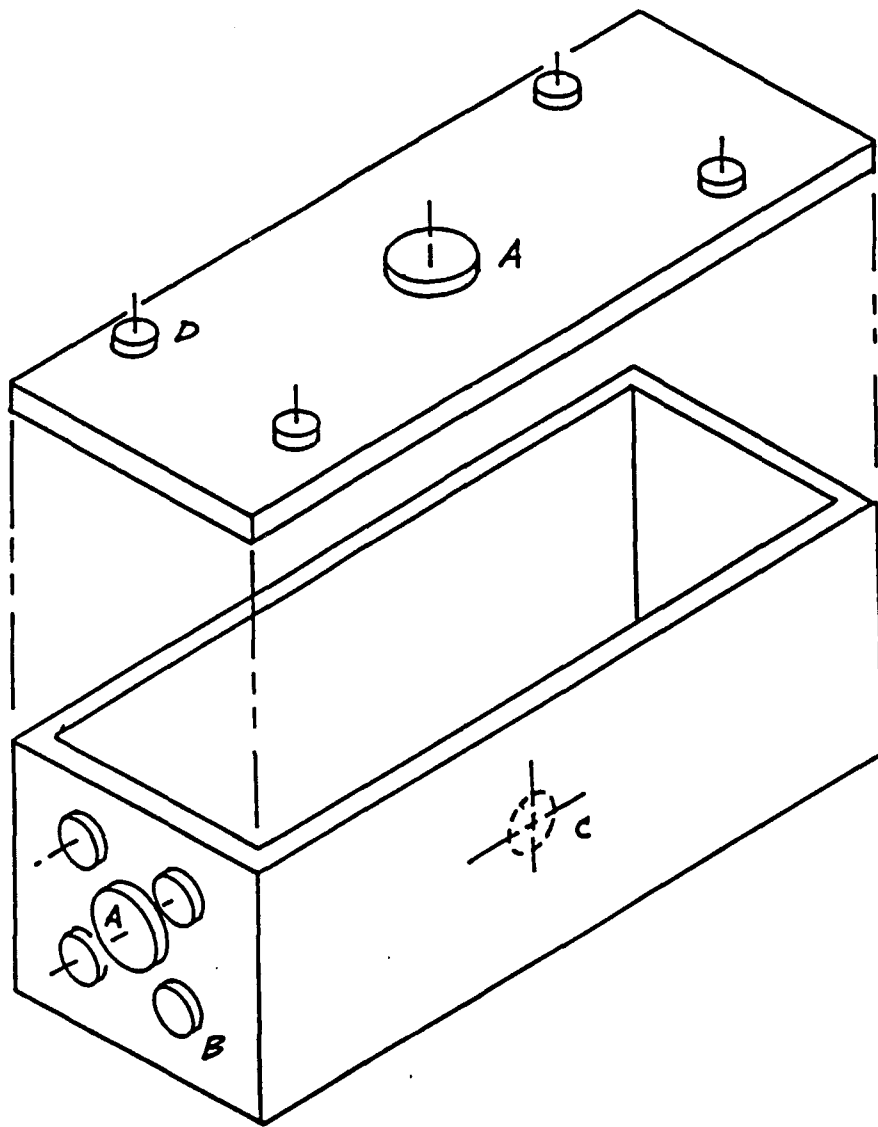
Sketch of the testbed laser vacuum box assembly. (Repeated from the first annual report, Ref. 1) Inside dimensions of the welded stainless steel vacuum box are 6" x 6" x 18". Fittings welded on A = 2 3/4" Del-seal flange; B = Del-seal miniflange; C = Bolt circle for kwikflange bulkhead fitting K075-BC; D=1/4" pipe coupling welded on, with additional 1/4" pipe thread tapped from below.
